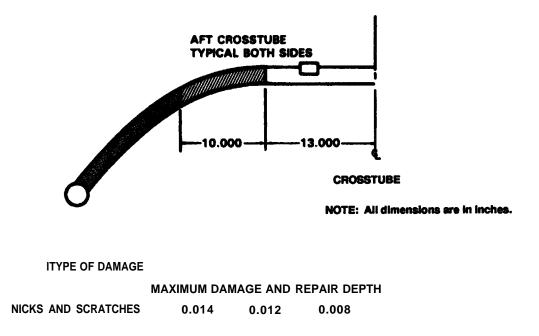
Standard Landing Gear Crosstube Inspection Limits
